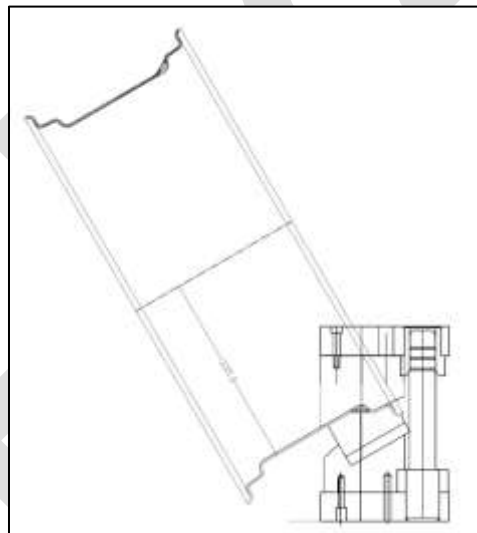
Valve Hole Depression Arrangement [Courtesy to RIM Plant]
